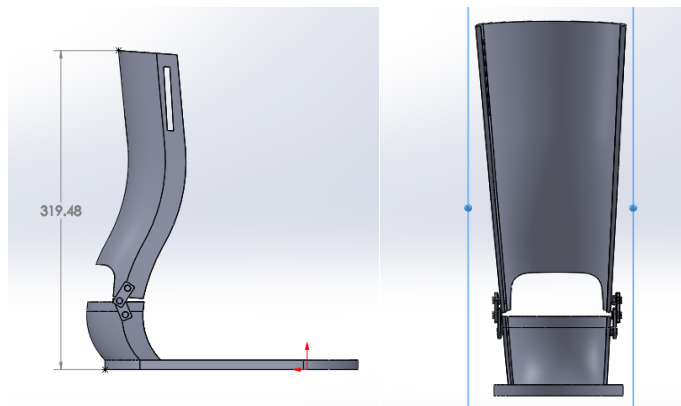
Articulated AFO dimensions (a) side view; (b) front-view
